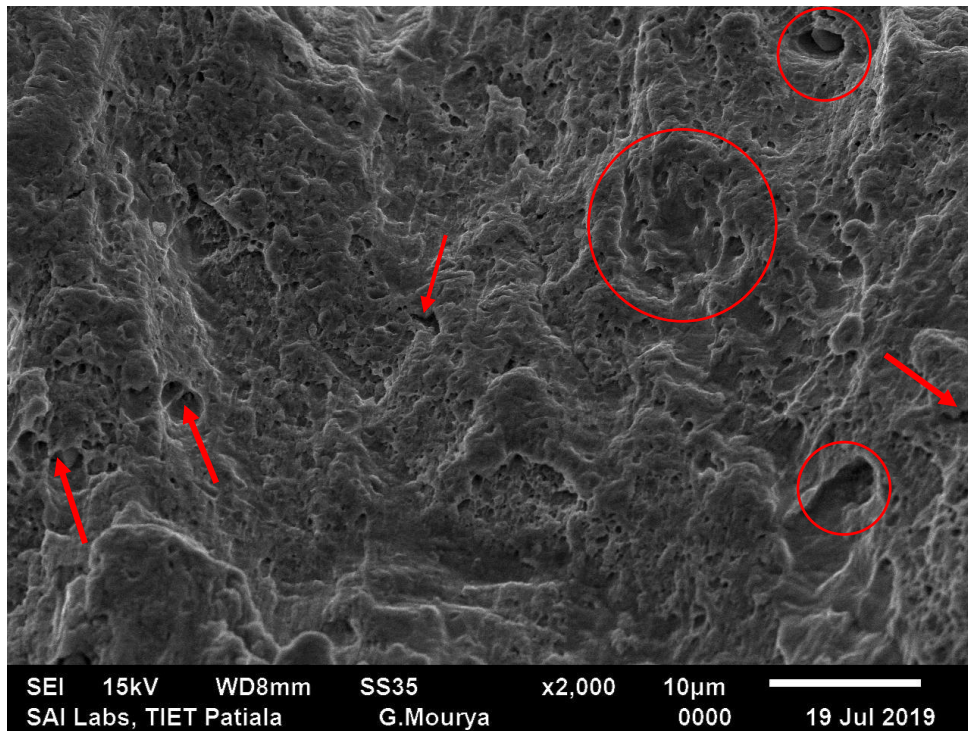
Top surface of sample 1 (Red arrows shows dimpled cleavage like structure)
